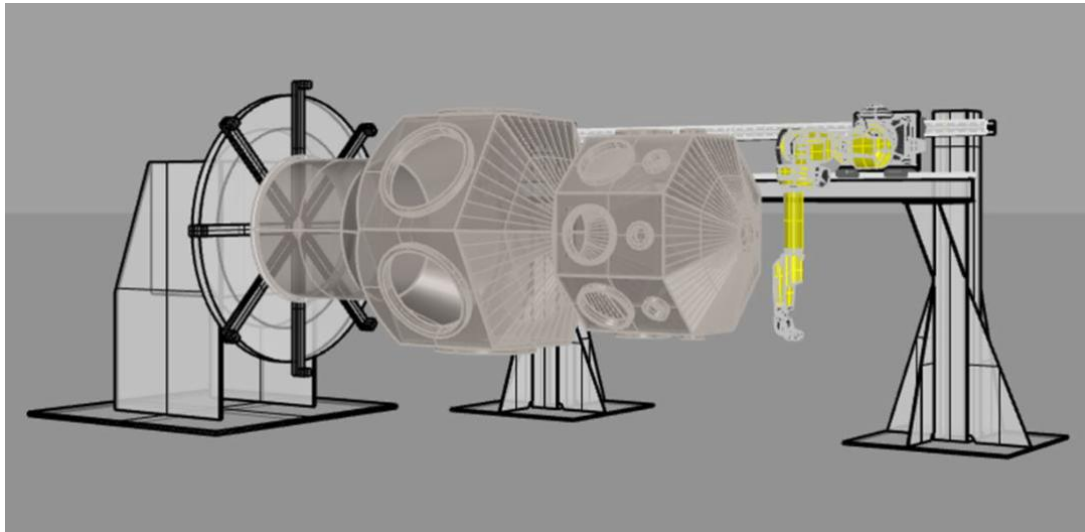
Illustration of the machine Design Concept 1, with mock-up chamber V3 clamped onto the tilt-turning table.
